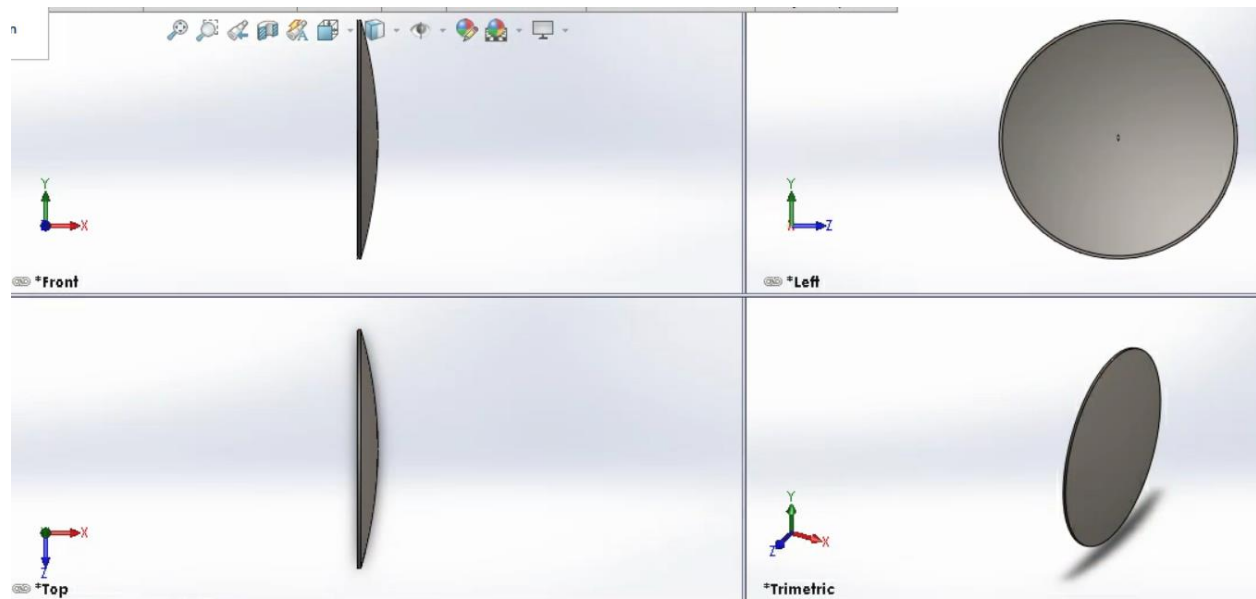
Isometric view of the water passage pull-in steel temporary bulkhead assembly
